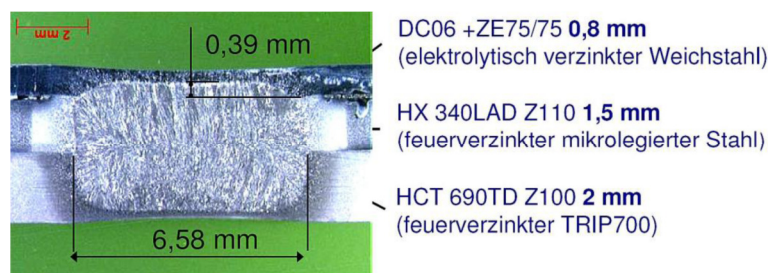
Resistance welding with process tape of sheets with different thicknesses
